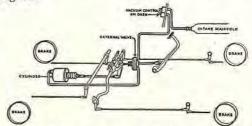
A. B-K vacuum power brake system applied to brake rods.
